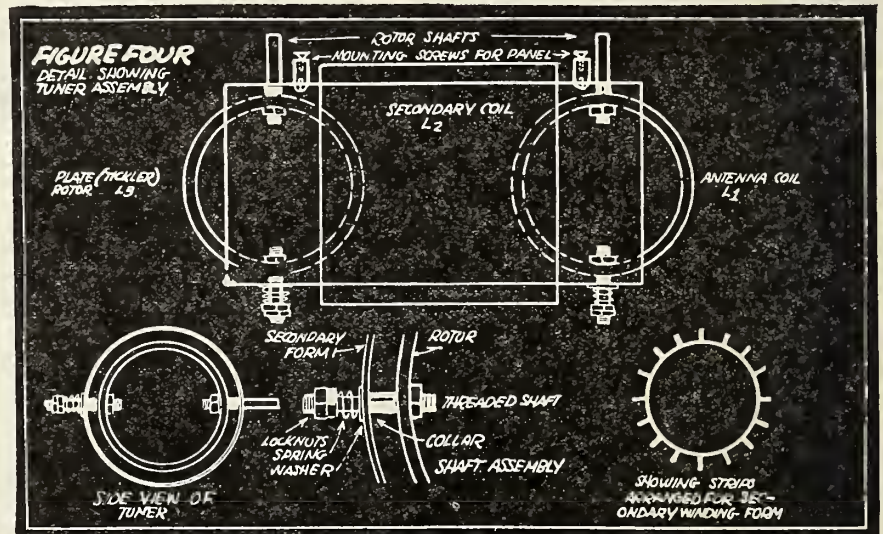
Details of the coupler are shown in the accompanying sketch. The top view shows the complete assembly of the coupler; the bottom left, a side view. The center bottom gives the details of the shaft and tension mounting, while the lower right gives an idea as to how the bakelite strips are fastened radially to the tube.
